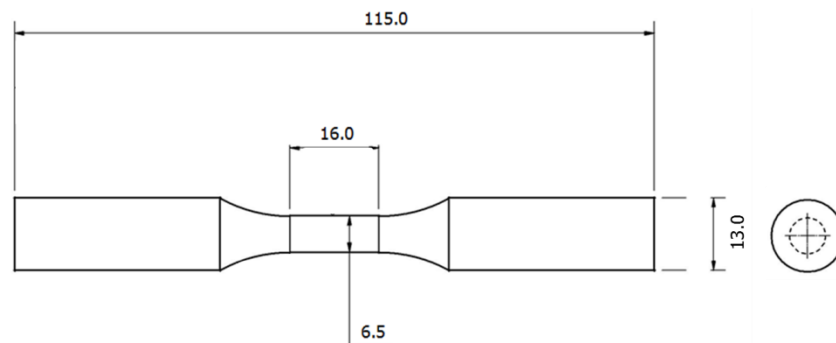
Fatigue specimen geometry for LCF testing (Dimensions in mm).
